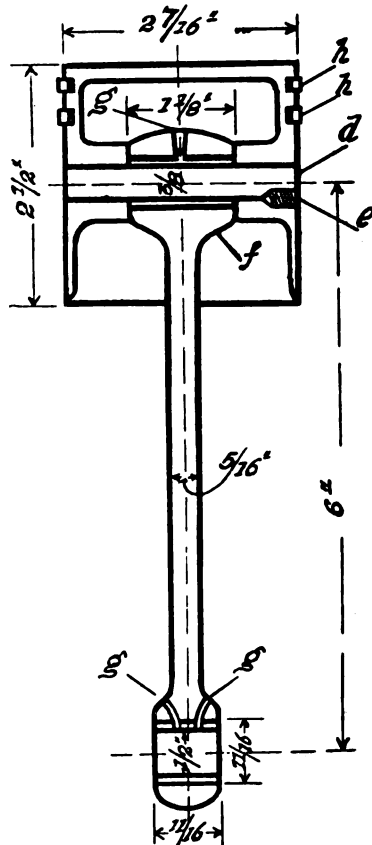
PISTON AND CONNECTING-ROD COMPLETE.
